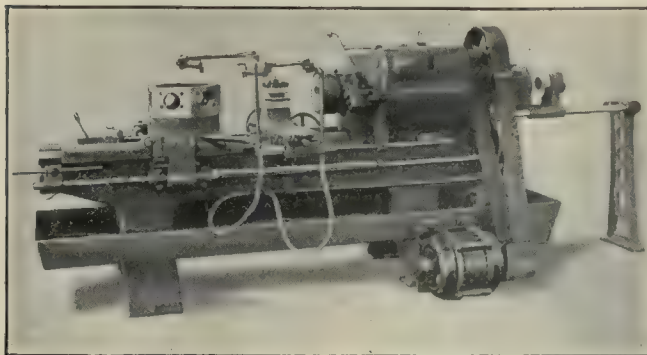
REAR VIEW OF THE UNIVERSAL TURRET LATHES WITH AUTOMATIC CHUCK AND MOTOR DRIVE
